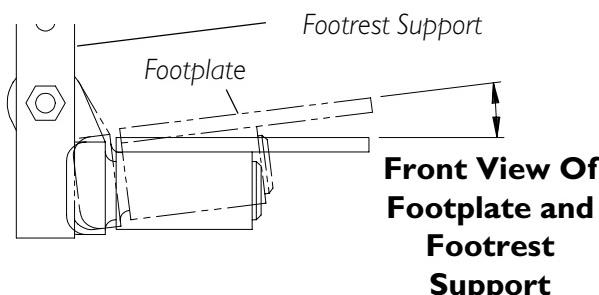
ADJUSTABLE ANGLE FLIP-UP FOOTPLATE PERPENDICULAR AND/OR INVERSION/EVERSION ADJUSTMENT
